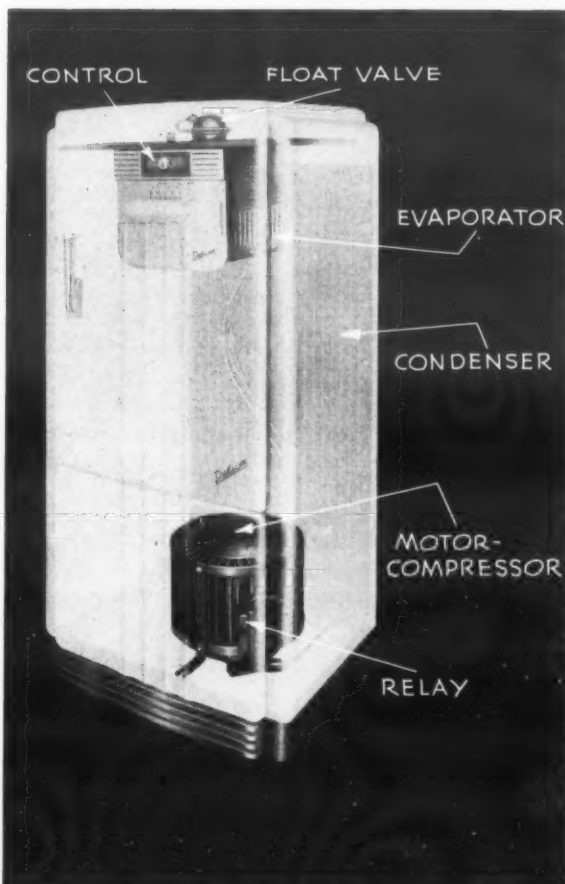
Type CF machine, Flatop—Sealed. (CFS, CH, CJ, and FBA are similar.)
